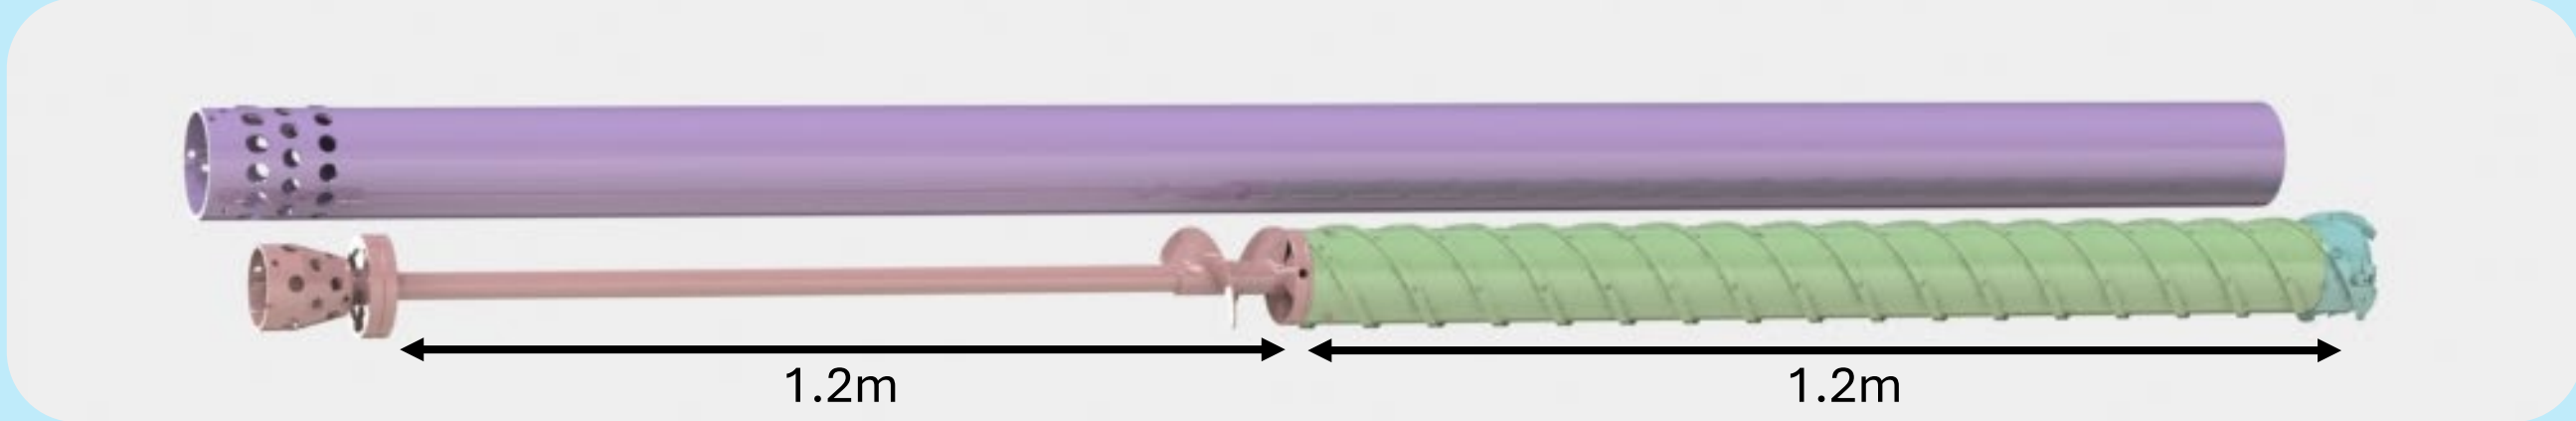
Conceptual image of the newly fabricated barrel set with outer barrel (purple), hollow shaft assembly (red), core barrel (green), and cutter head (blue). Dimensions shown indicate the length of the chip chamber (left) and the longest core that could fit inside this drill (right).
